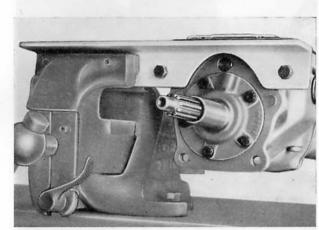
The transmission can be completely disassembled and reassembled mounted on a shaped piece of angle iron secured in a vice
